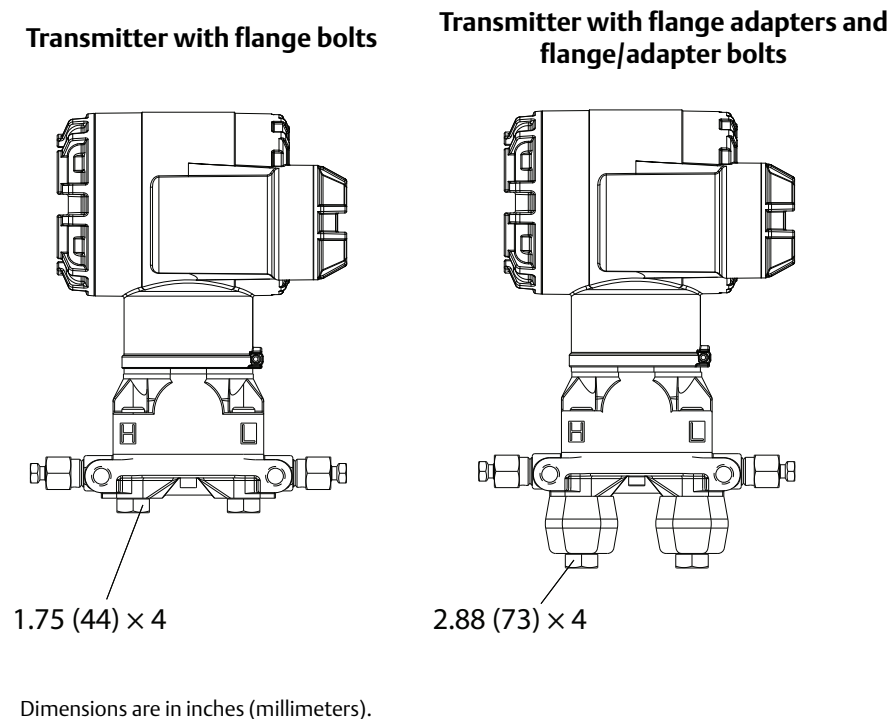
Mounting Bolts and Bolt Configurations for Coplanar Flange
